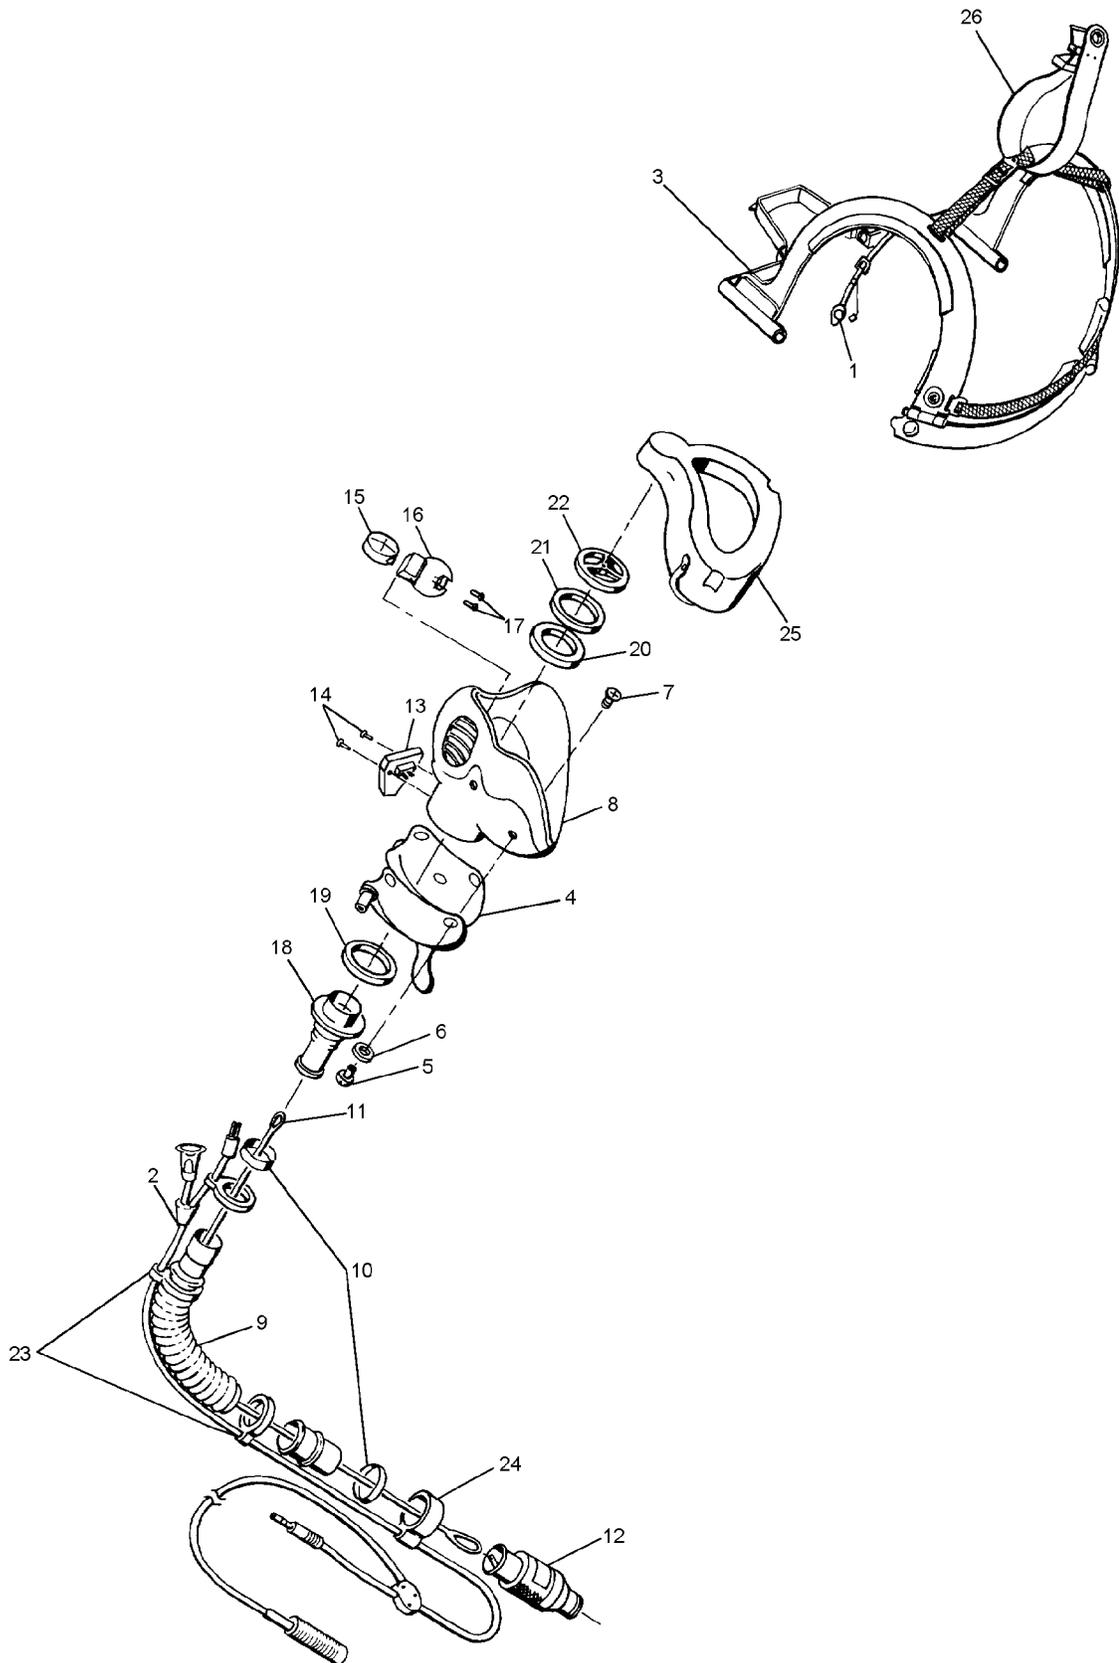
MBU-10/P Oxygen Mask Assembly, IPB
